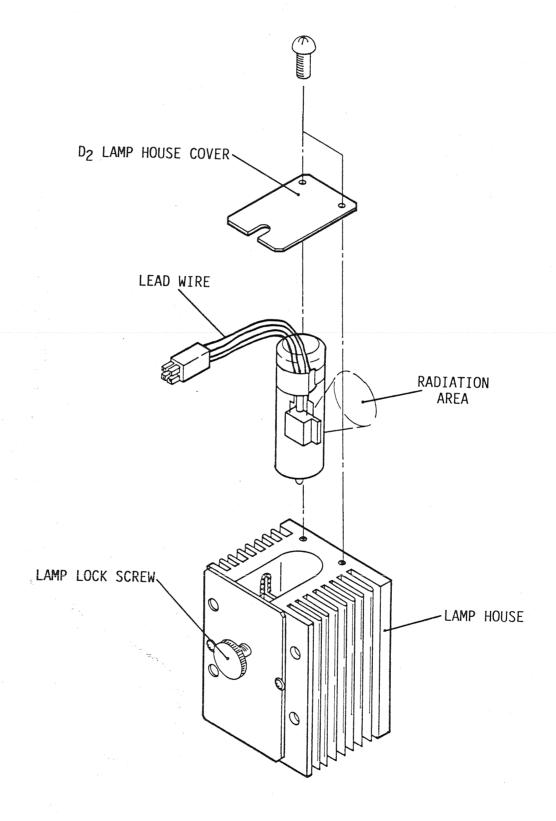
Partially Exploded View of D_2 Lamp House Assembly
